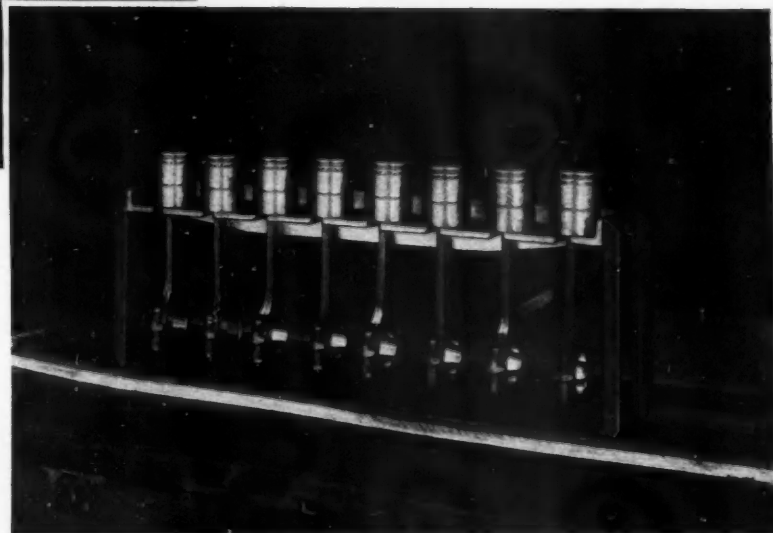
(right)—The rack used for carrying matched connecting rod and piston assemblies from inspection to engine line
